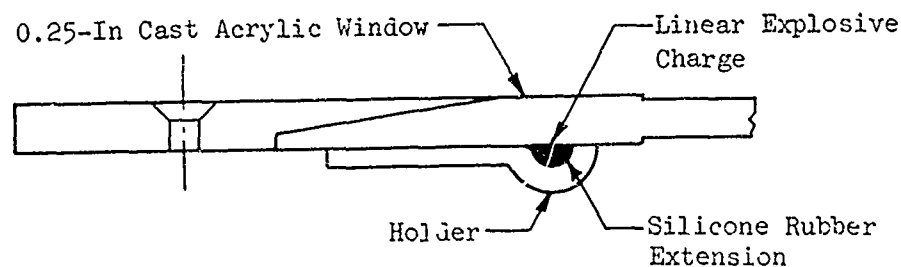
Sikorsky S-72 Cutting Assembly.
